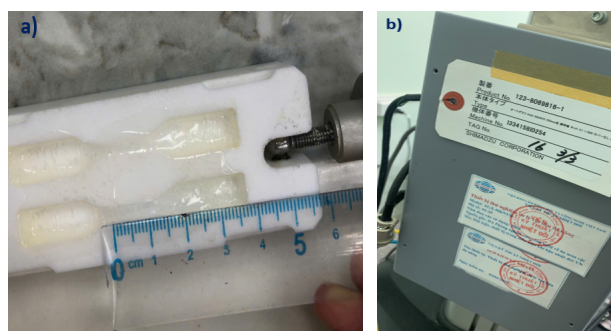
(a) Epoxy casting mold, with dimensions meeting the TCVN 4501 standard; (b) AGX-50k NVD multifunctional mechanical property testing machine at Institute for Tropical Technology
